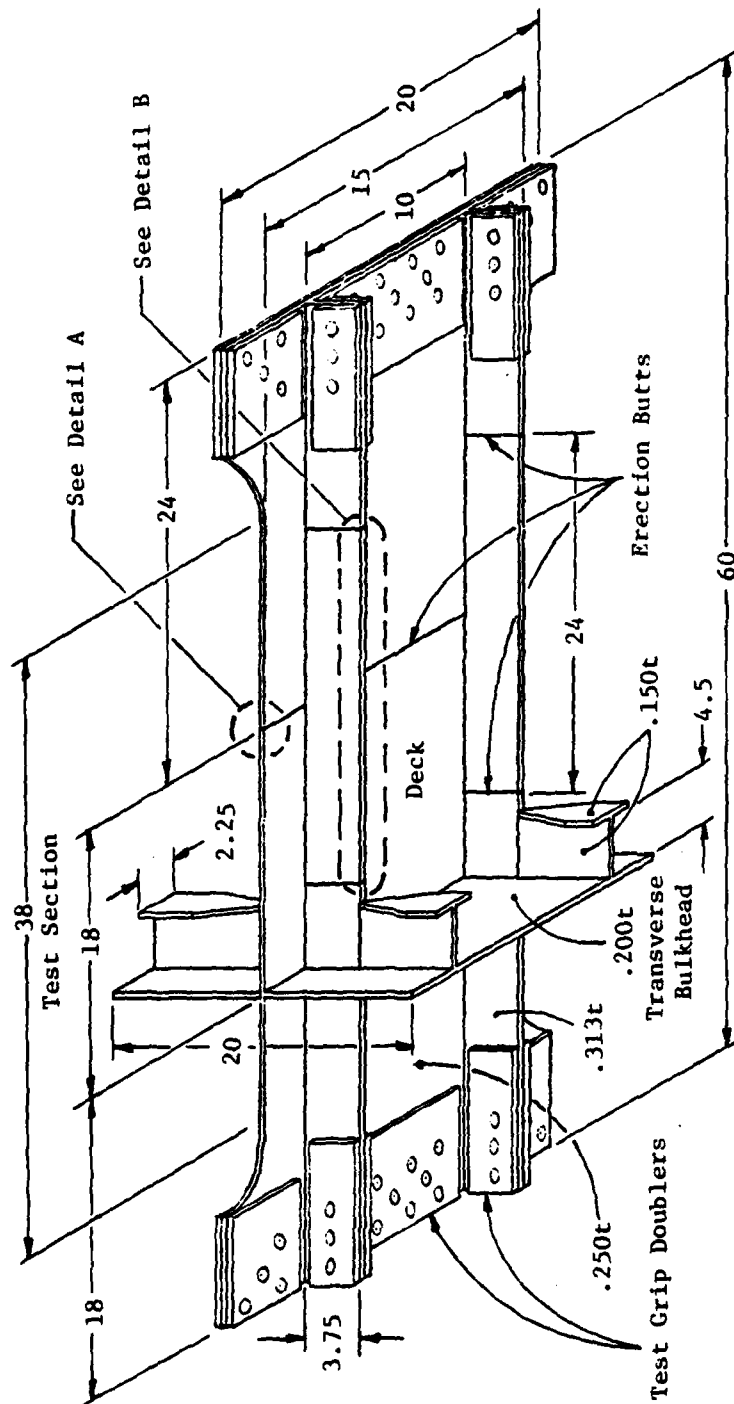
Deck/Bulkhead Element Test Specimen Configuration
